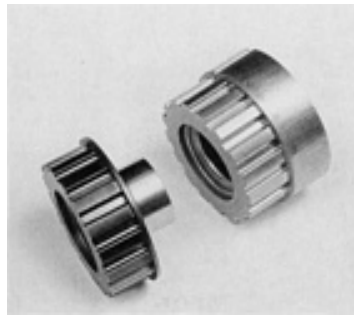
Iron-carbon P/M drive gear. (a) Finished machined, hardened, ground part. The hub diameter is machined oversized (+0.254 mm, or +0.010 in.) to allow for final grinding. (b) P/M blank as-pressed
